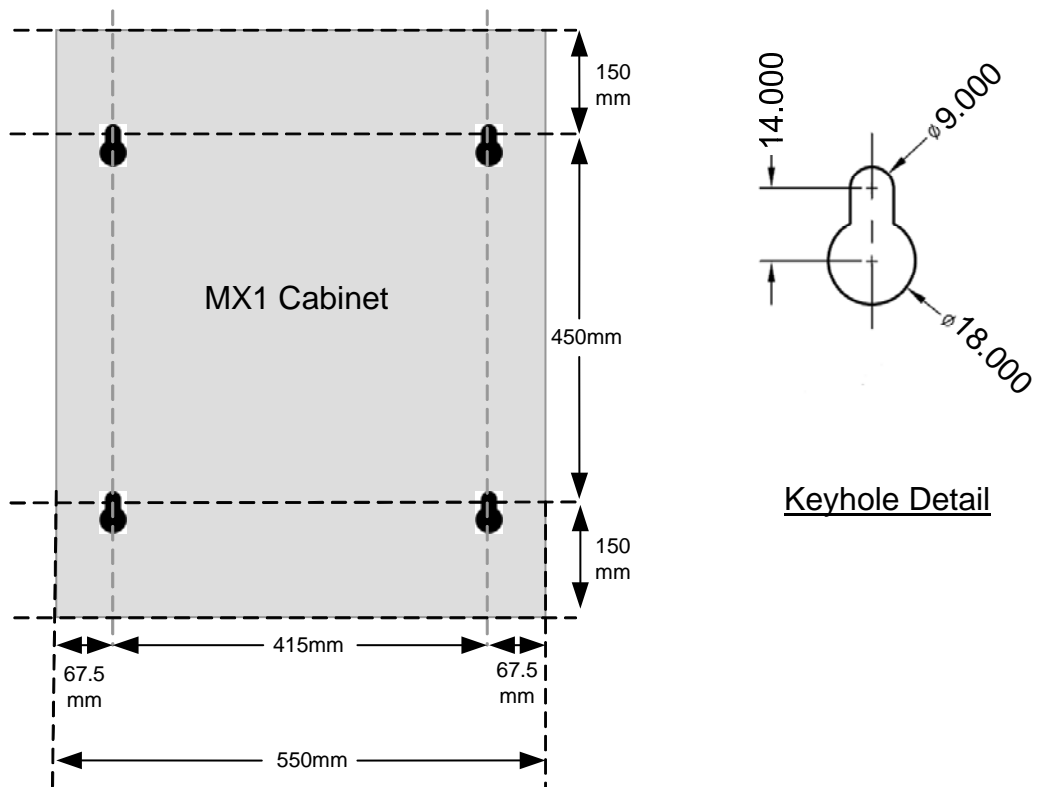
Keyhole Pattern for Mounting 15U Cabinet
